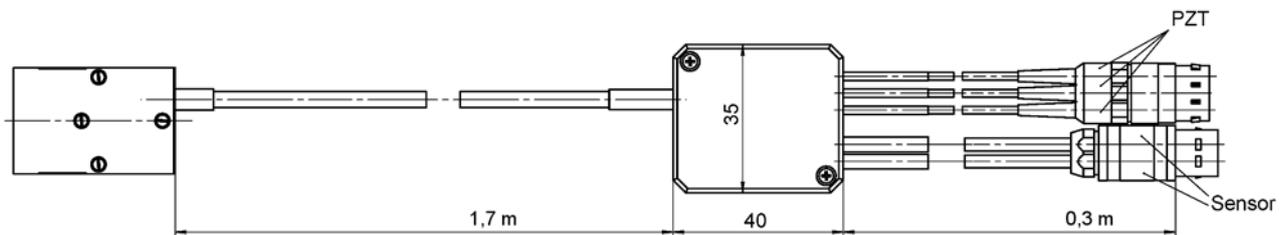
S-334.2SL1: Position and dimensions of the cable splitter box
